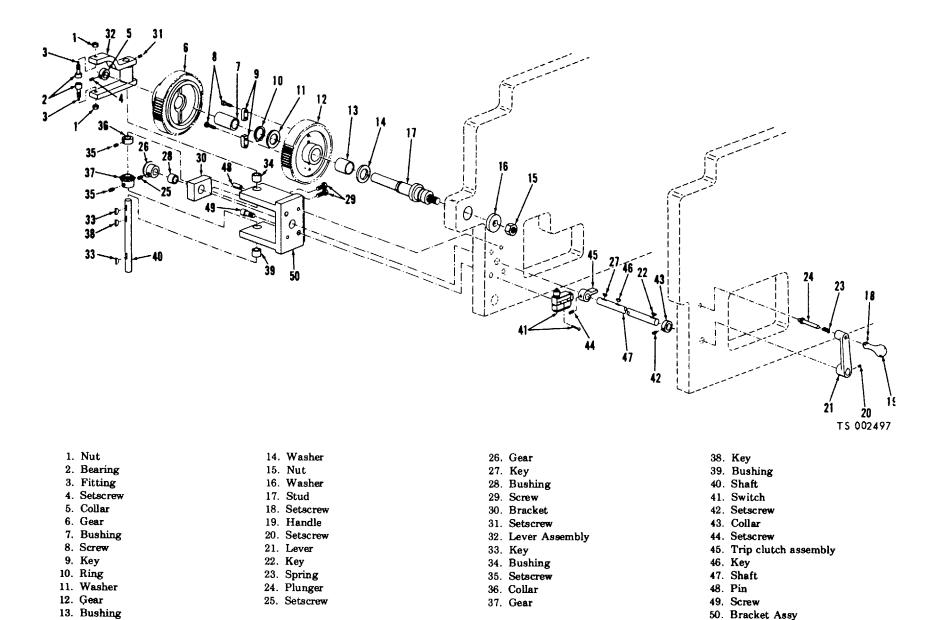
Trolley, paper guide and nipping roller alignment assembly (Sheet 1 of 7). 4-94
